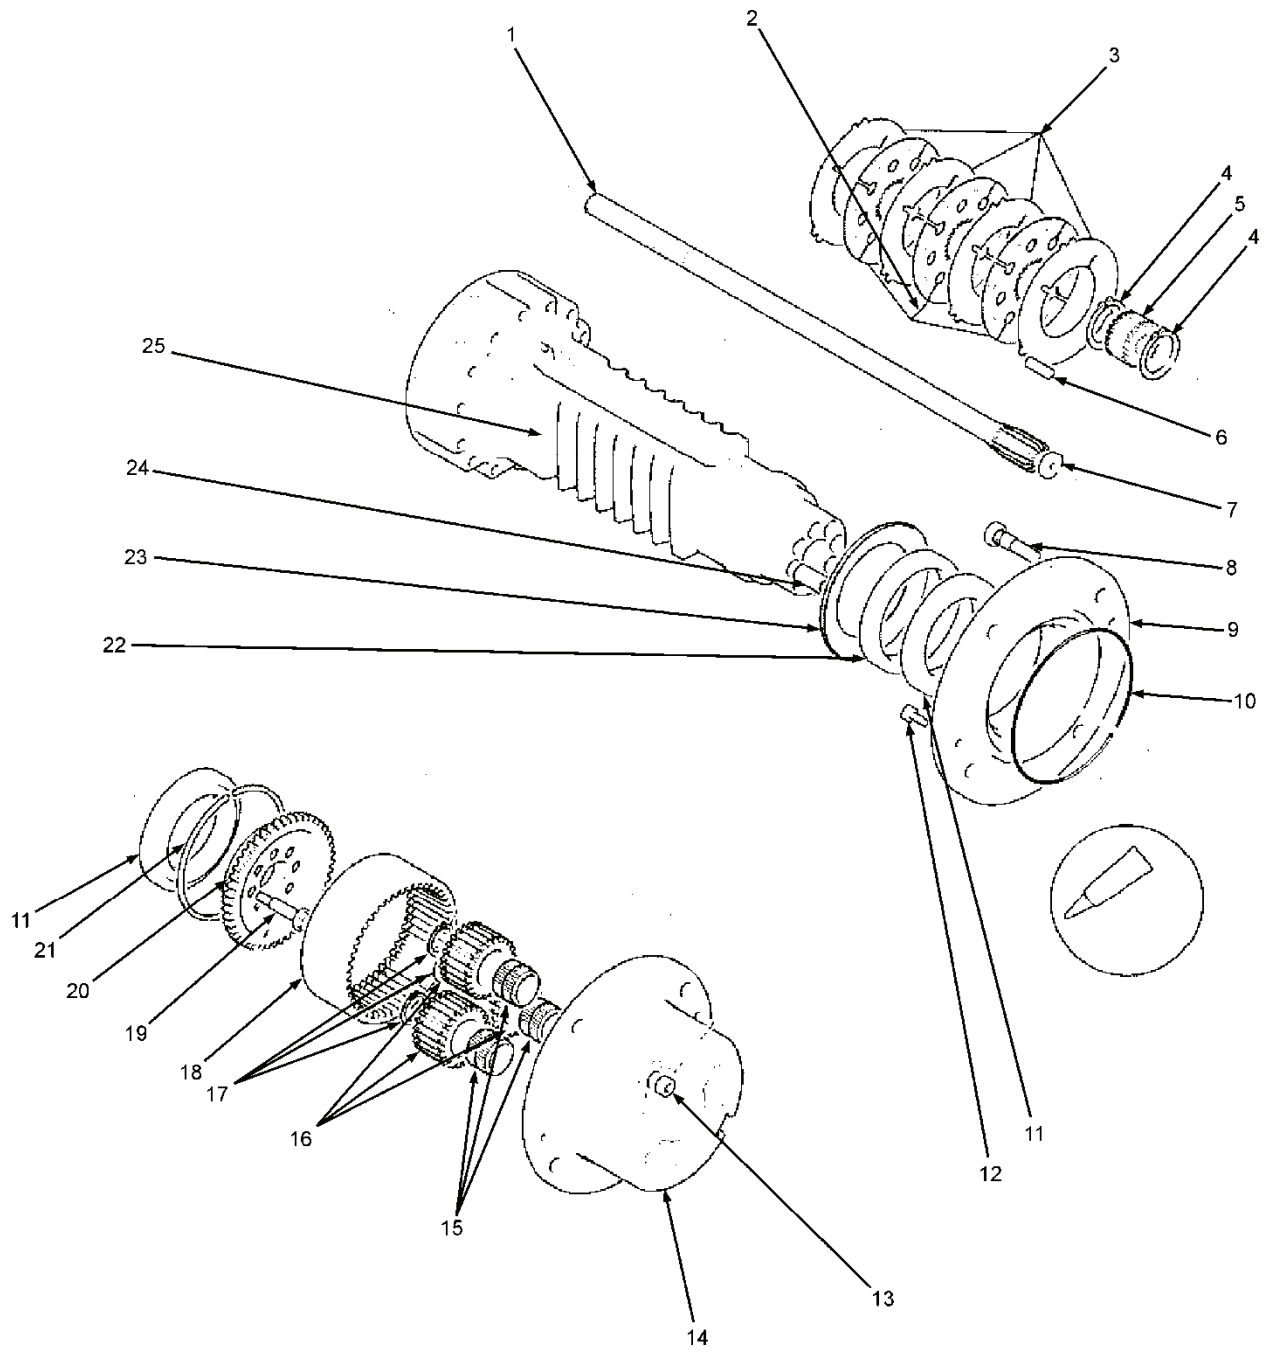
AXLE ARM/WHEEL HUB - REAR AXLE
